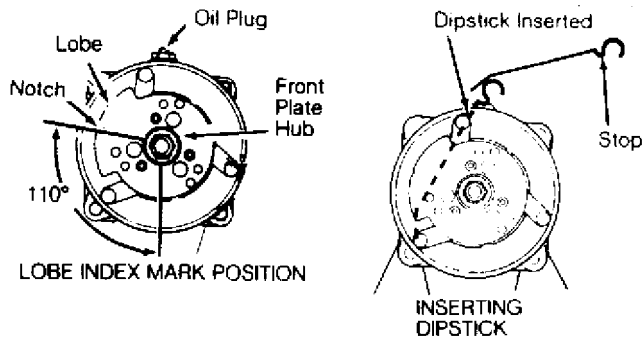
Sanden 5-Cylinder Oil Level Checking
